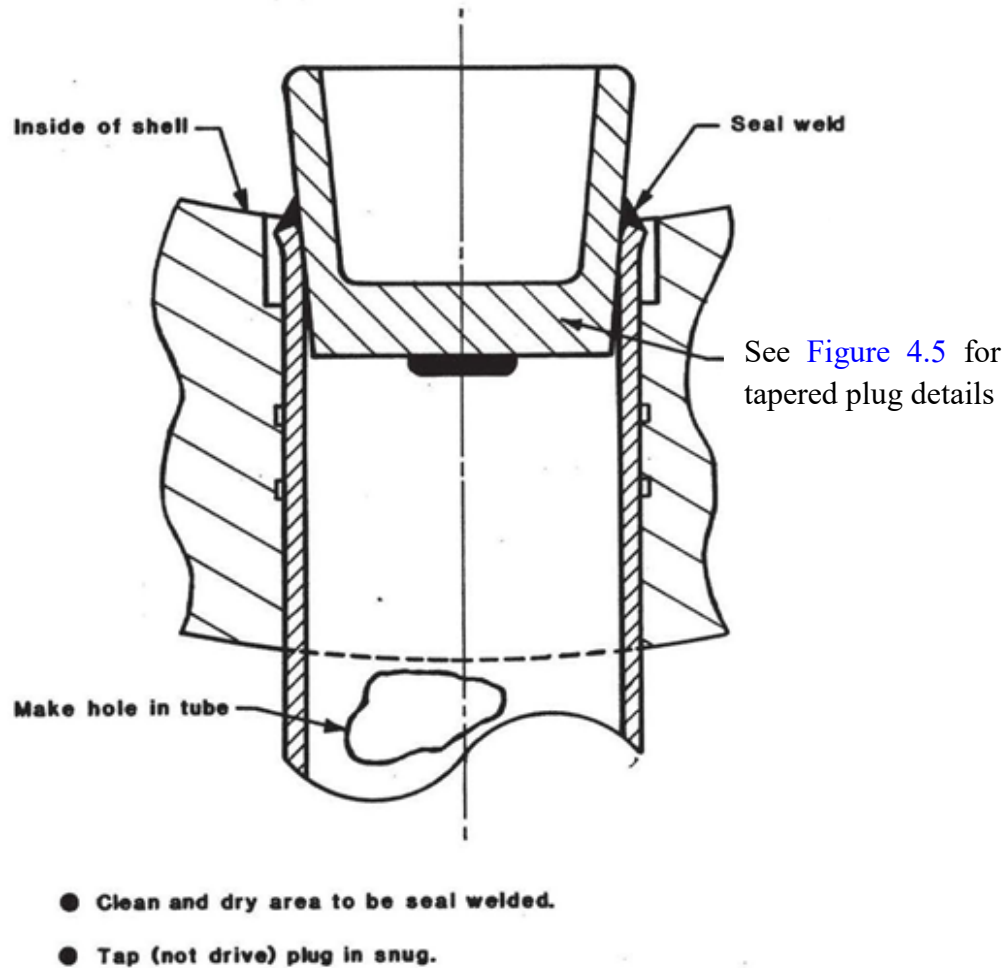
Plugging a Failed Tube with a Tapered Plug in a Drum with Shallow Internal Counterbores
